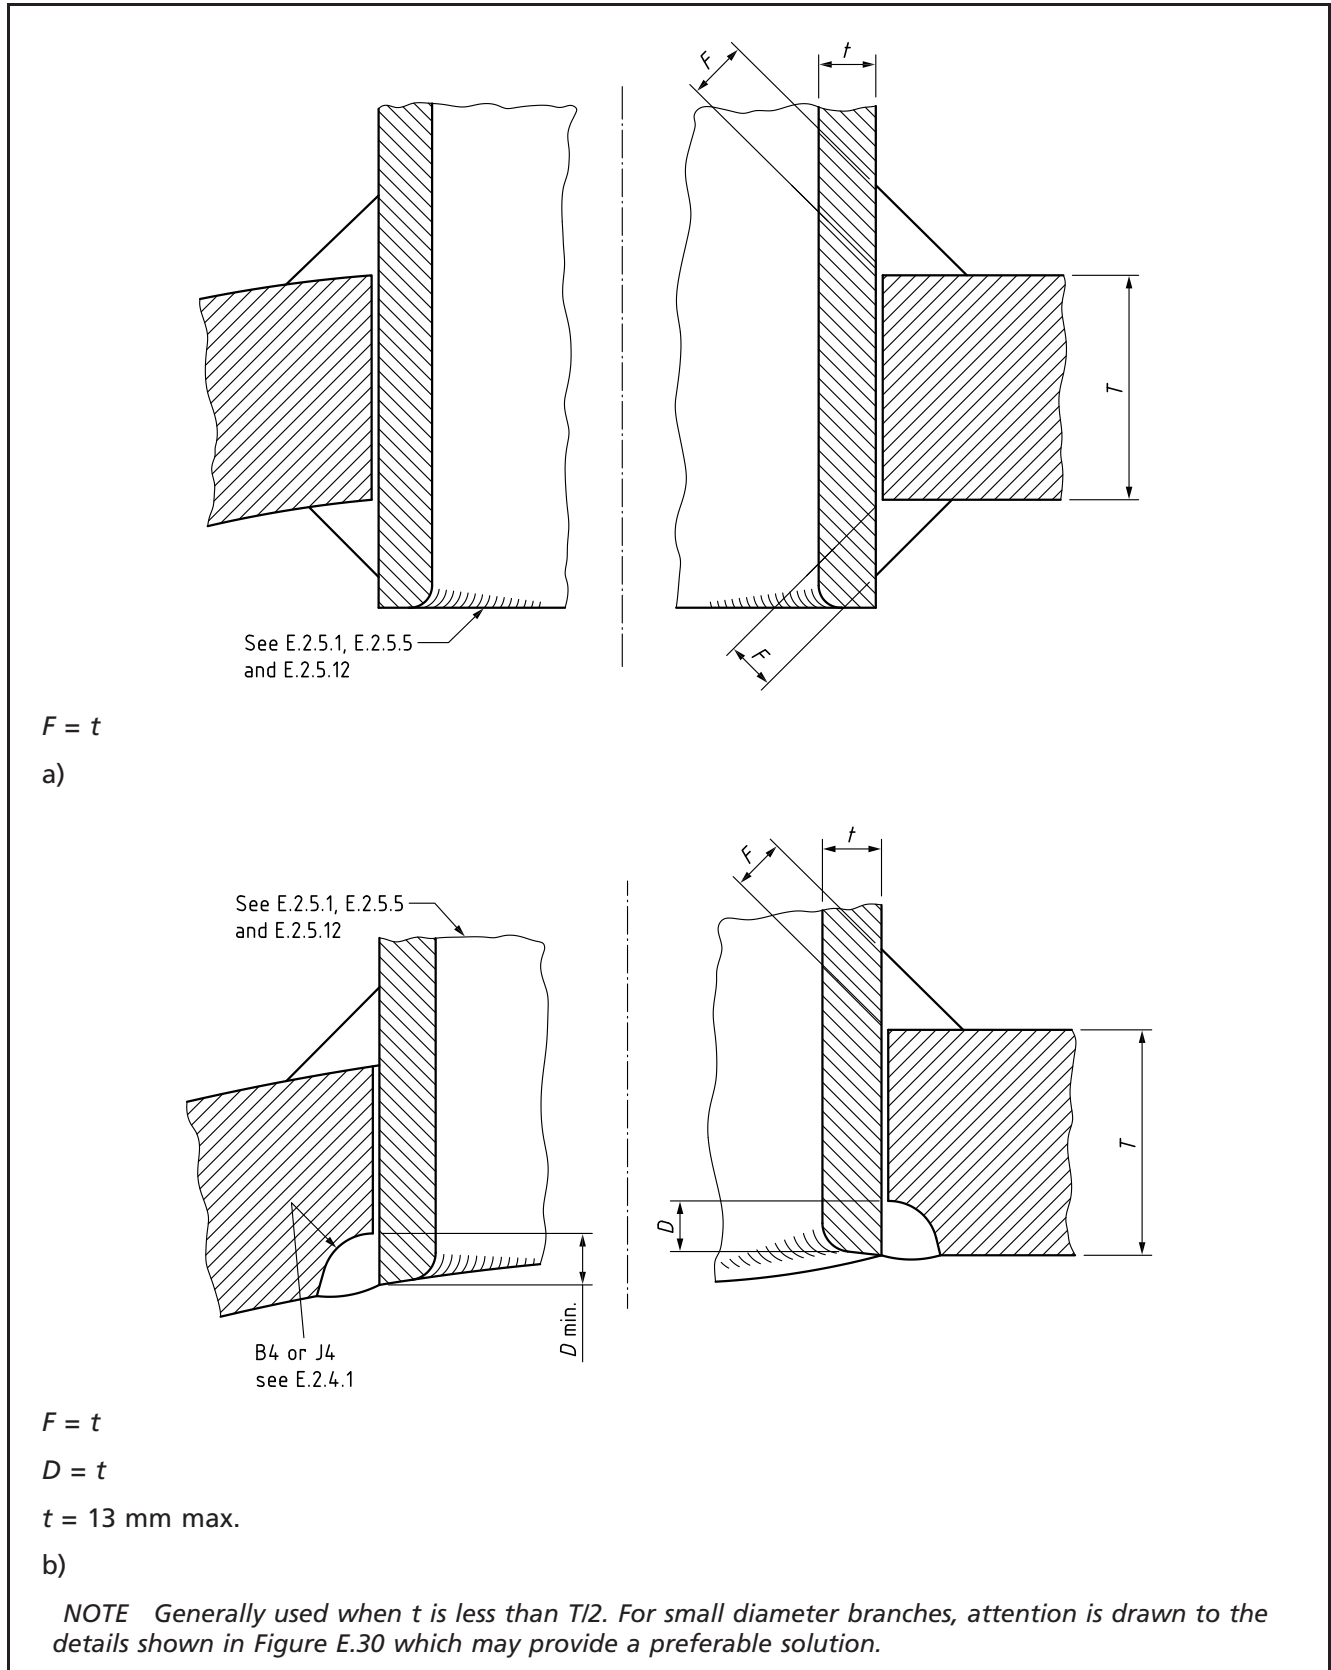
Set-in branches: partial penetration butt welded connections
